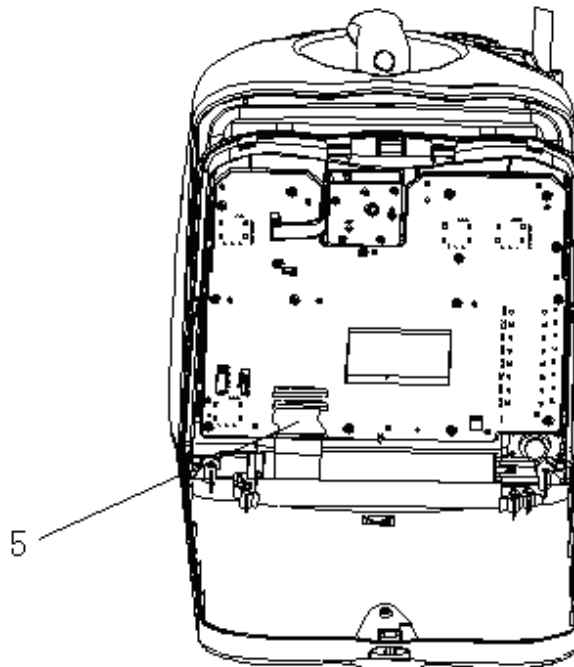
Sketch Map of Top Cover of Keyboard Disassembly
